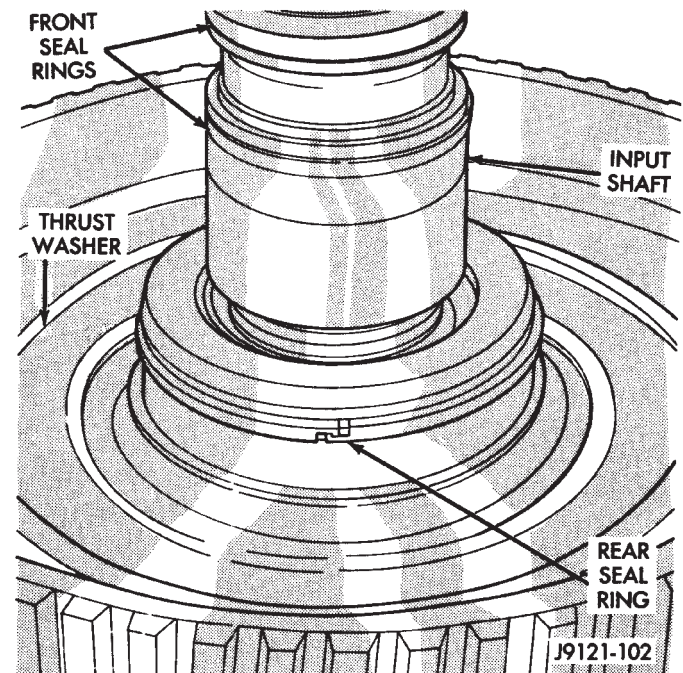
Input Shaft Seal Ring And Thrust Washer Installation—46RH
